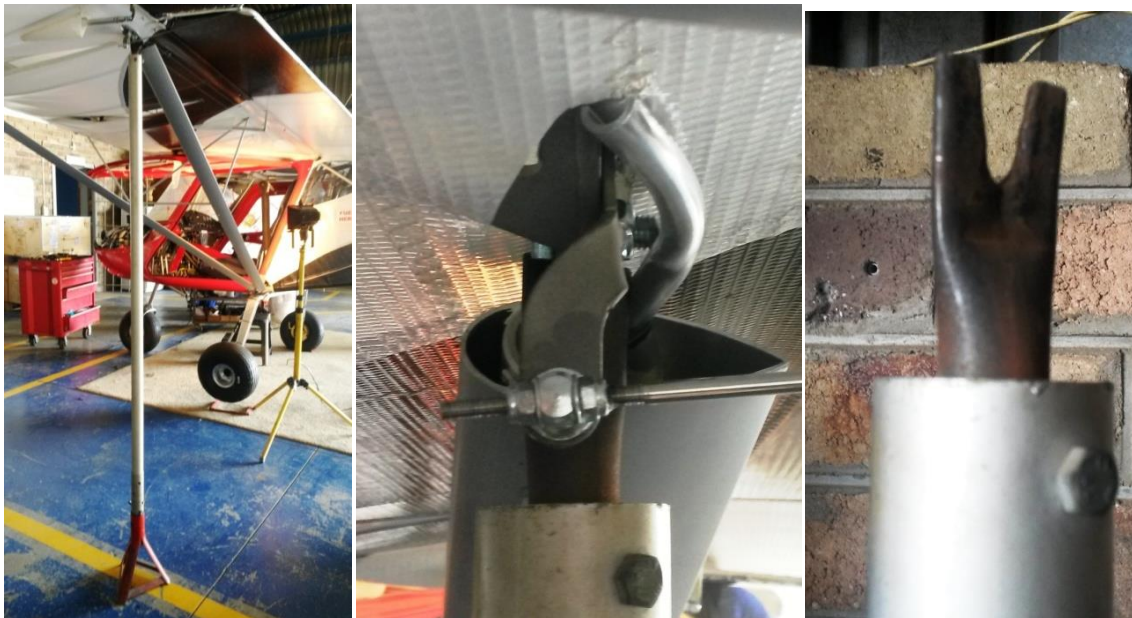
(a) Raising the main gear using a wing stand, (b) wing stand mounting point at the wing/strut intersection point and (c) wing stand detail
